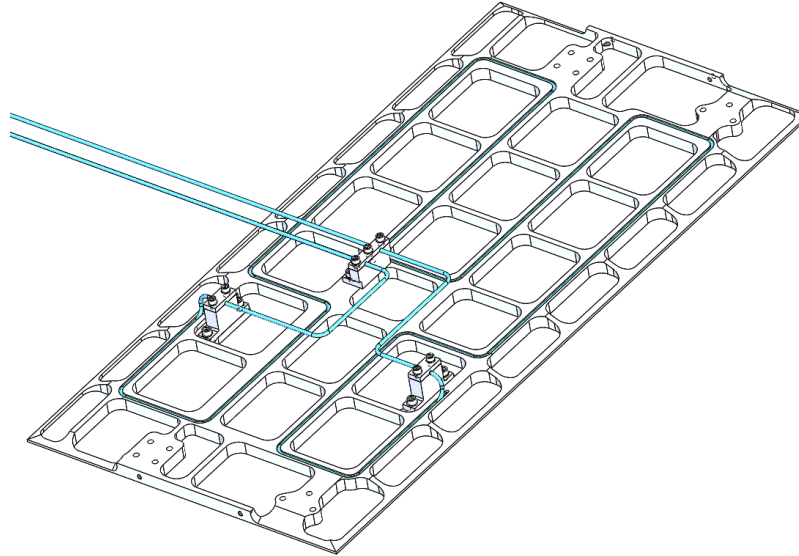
Condenser Section of the Transport Line Soldered into the Serpentine Groove in the VISNIR Radiator Panel
